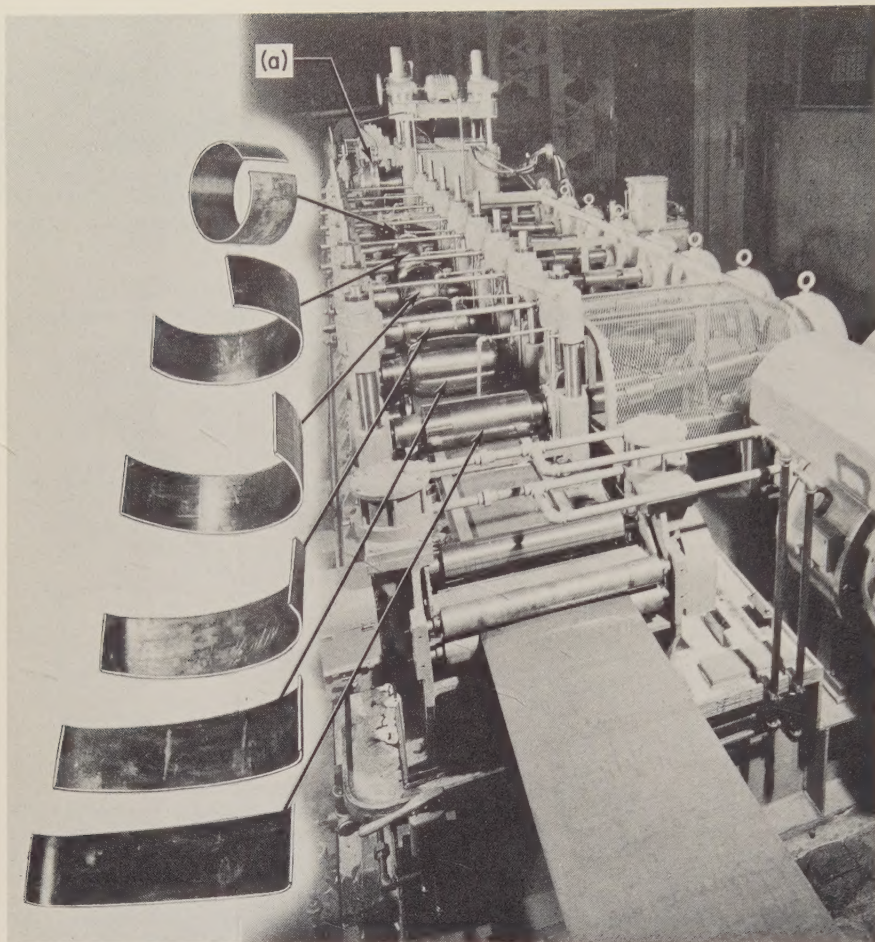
The first step in producing rectangular frame side rails consists of passing a flat strip of steel through six sizing roll stations, mounted in a standard-type tube mill, to produce a circular tube of specific diameter. The tube, after leaving the last sizing roll, passes directly to the resistance seam welding station (a). The inset shows the transformation which takes place in the strip steel as it progresses through each sizing roll.
